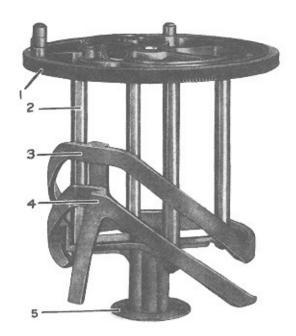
No. 11648-A Turntable Cam and Lift Assembly (Side View)
